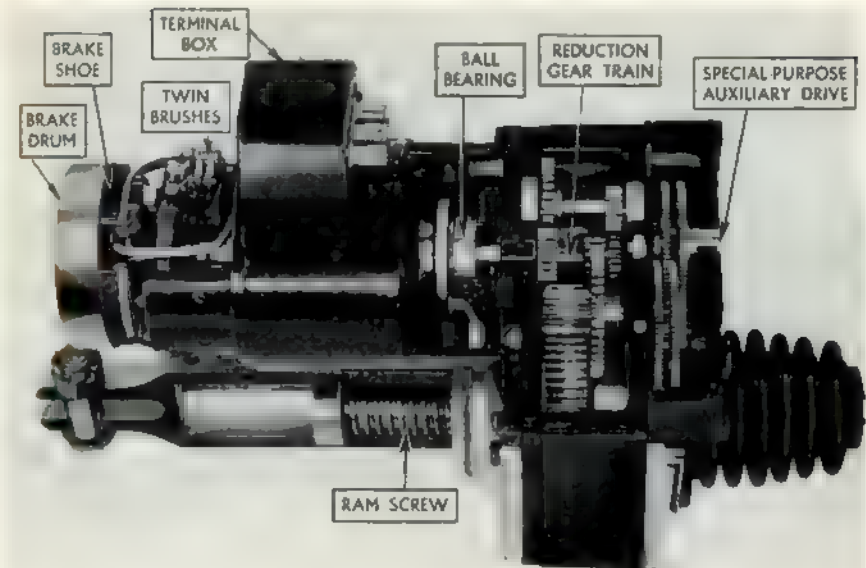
German actuator sectioned to show reduction gear train and ram screw.
